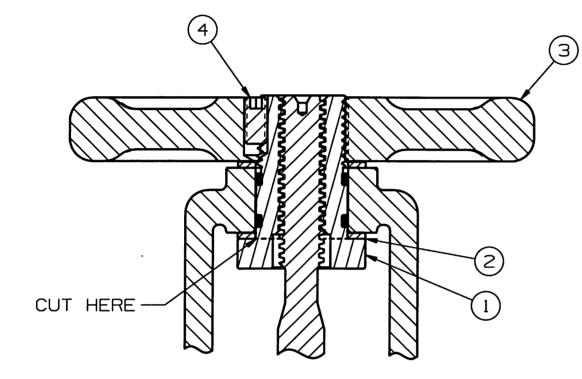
EXISTING YOKE GLAND ASSEMBLY
